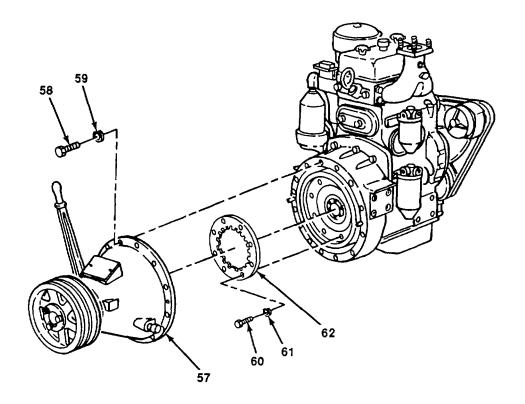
Engine Assembly, Removal (Sheet 3 of 4).
